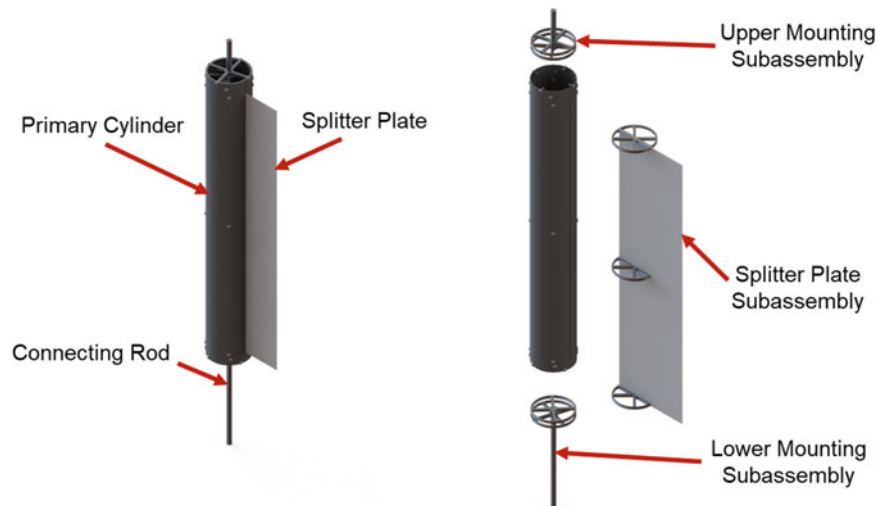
Fully assembled and exploded view of the variable frequency disturbance generator showing the major components and subassemblies used during construction
